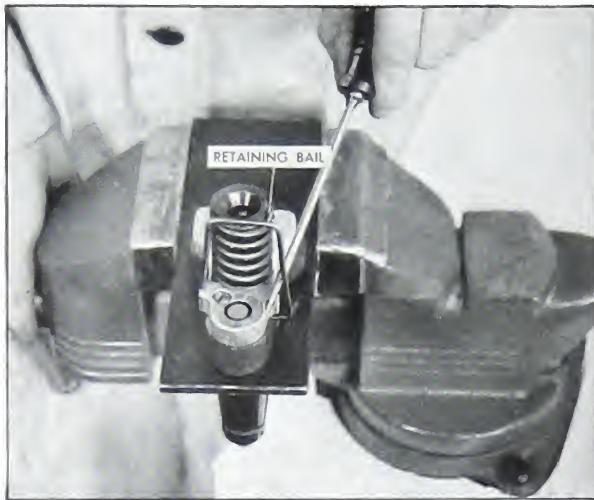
Removing plunger retaining bail—Tractor type injector
